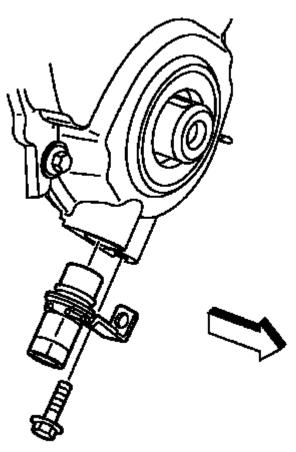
View Of CKP Sensor & Bolt Courtesy of GENERAL MOTORS CORP.
